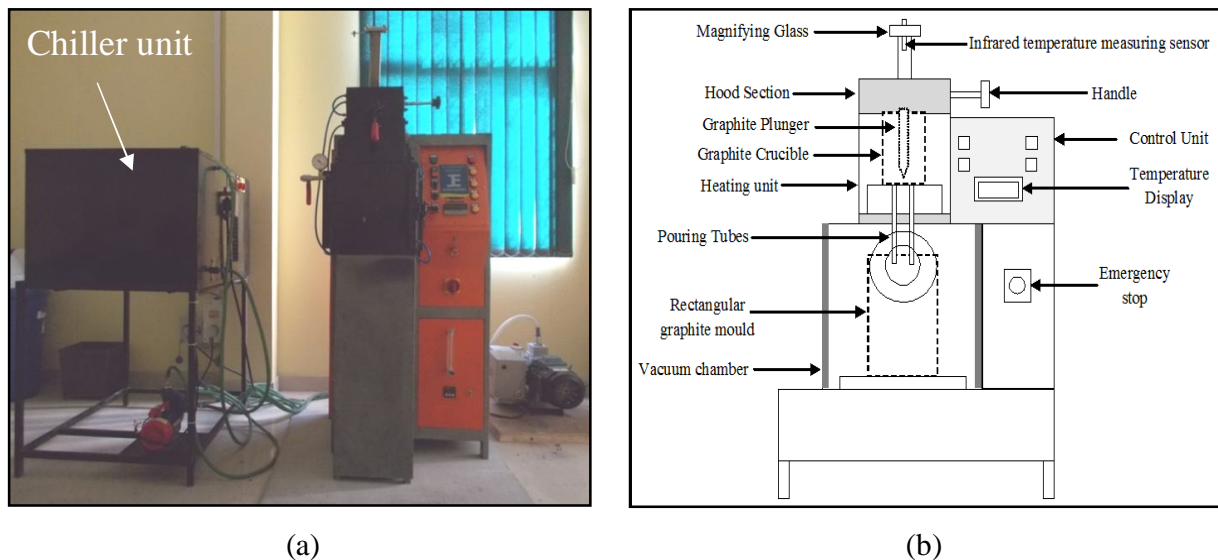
Experimental setup of casting machine, (a) Image of the casting setup (b) Schematic diagram of the casting machine
